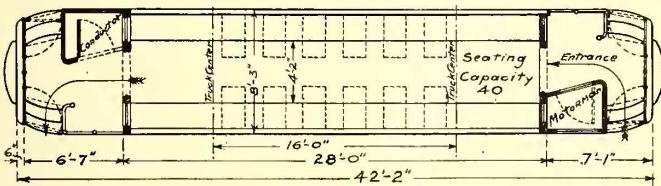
Floor Plan of Double End Pay-As-You-Leave Car, Designed by W. S. Twining
